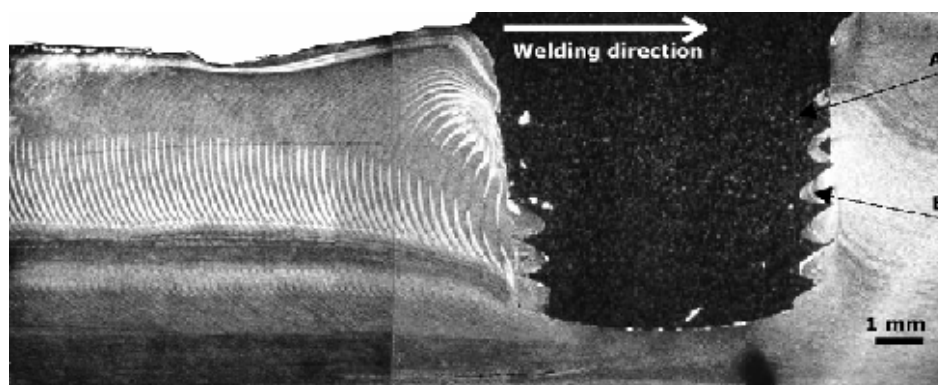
Section through 6061-T6 weld with the tool removed showing material movement and deposition from the leading to the trailing edges of the tool [8]
